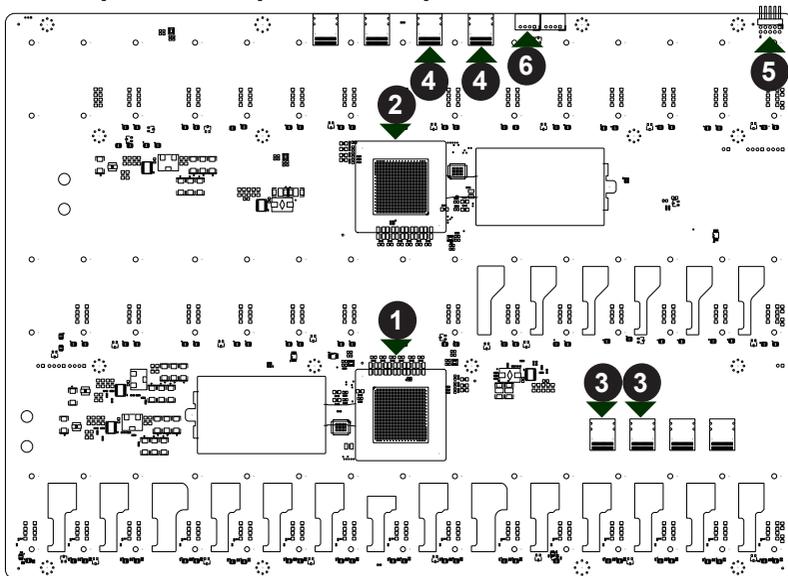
BPN-SAS3-946LEL1 Expander Chip Side Components
